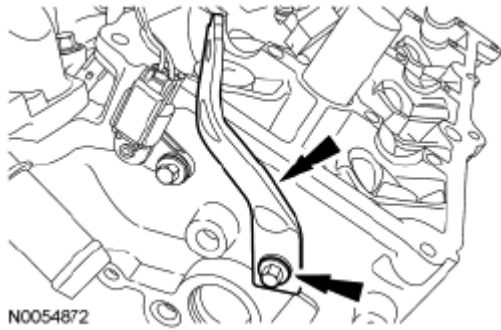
Locating Upper Intake Manifold Support Bracket & Bolt
